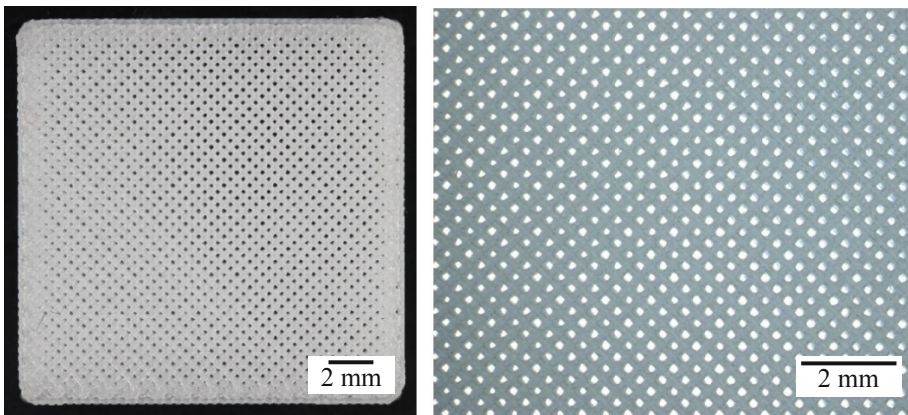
Initial specimen in full size view (left) and with enlargement (right)
